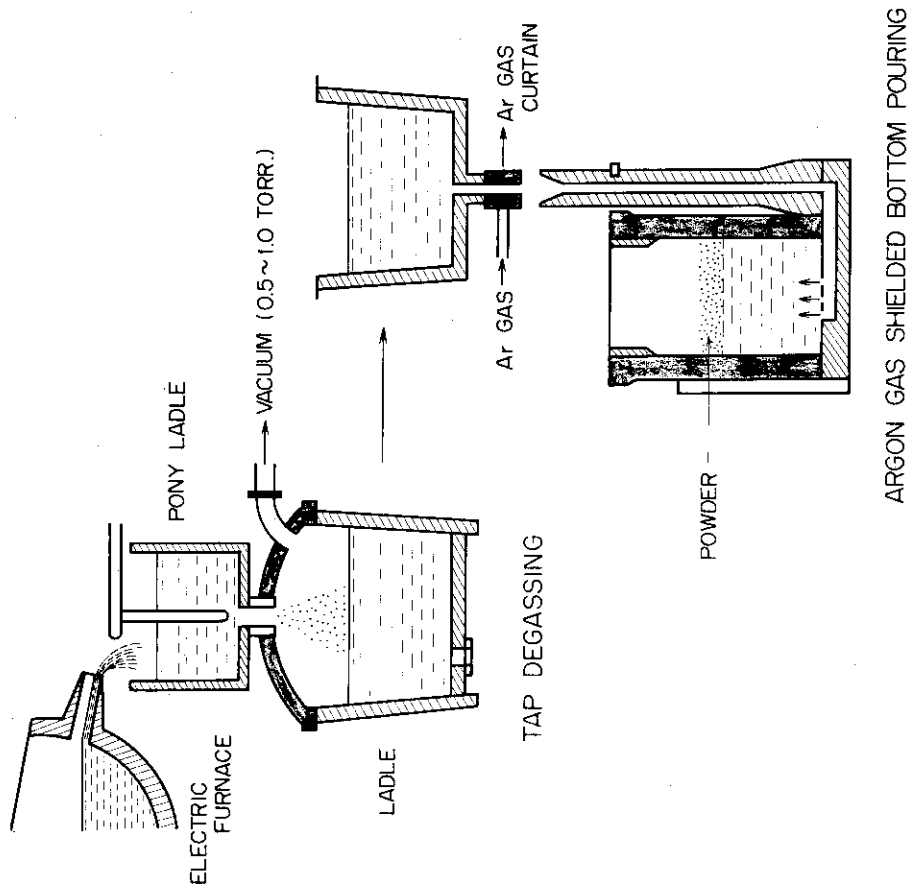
SCHEMATIC DRAWING OF TAP DEGASSING AND BOTTOM POURING FOR RPV STEEL
